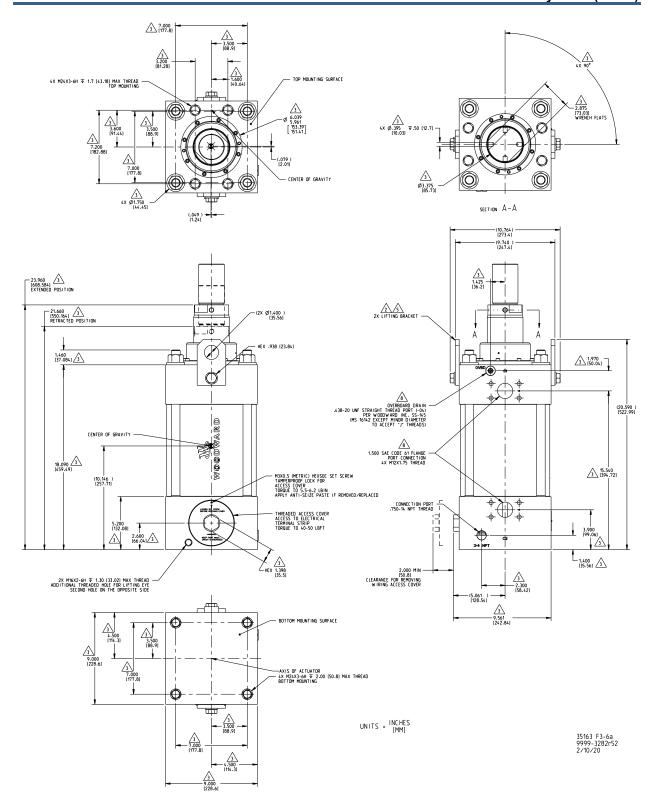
VSPC 8x2.30 Installation Dimensions
